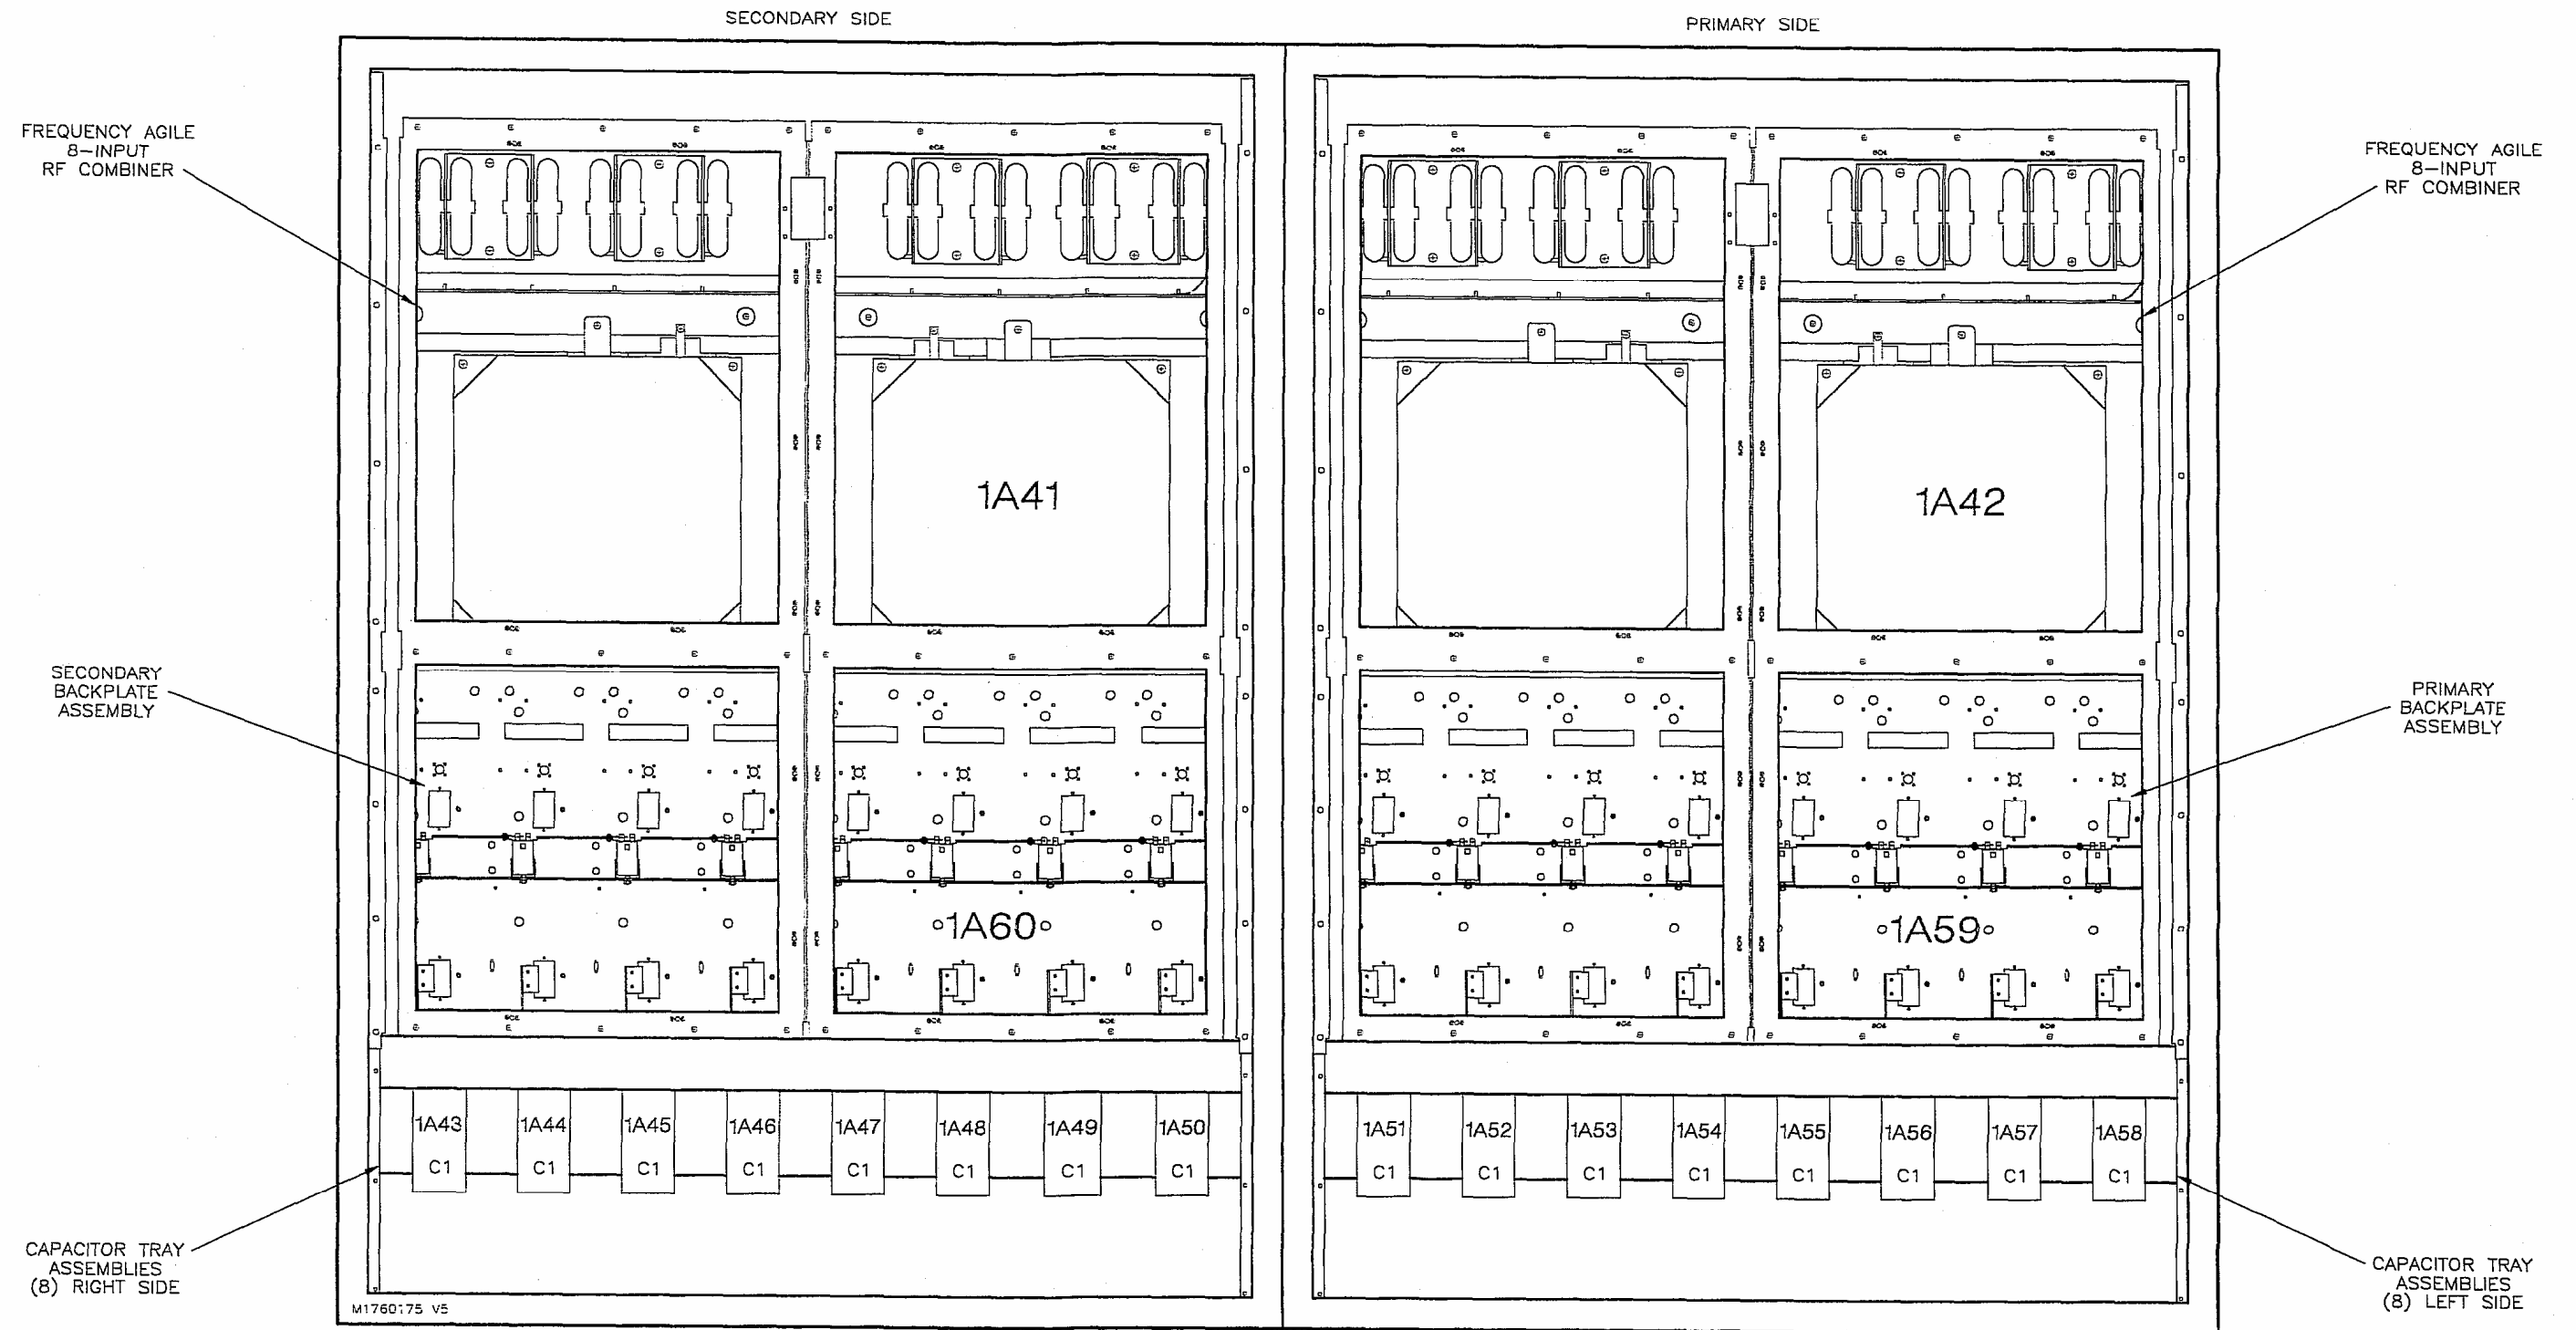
Assembly Detail - NAR199D 100kW RF Power Module Cabinet (Rear)
